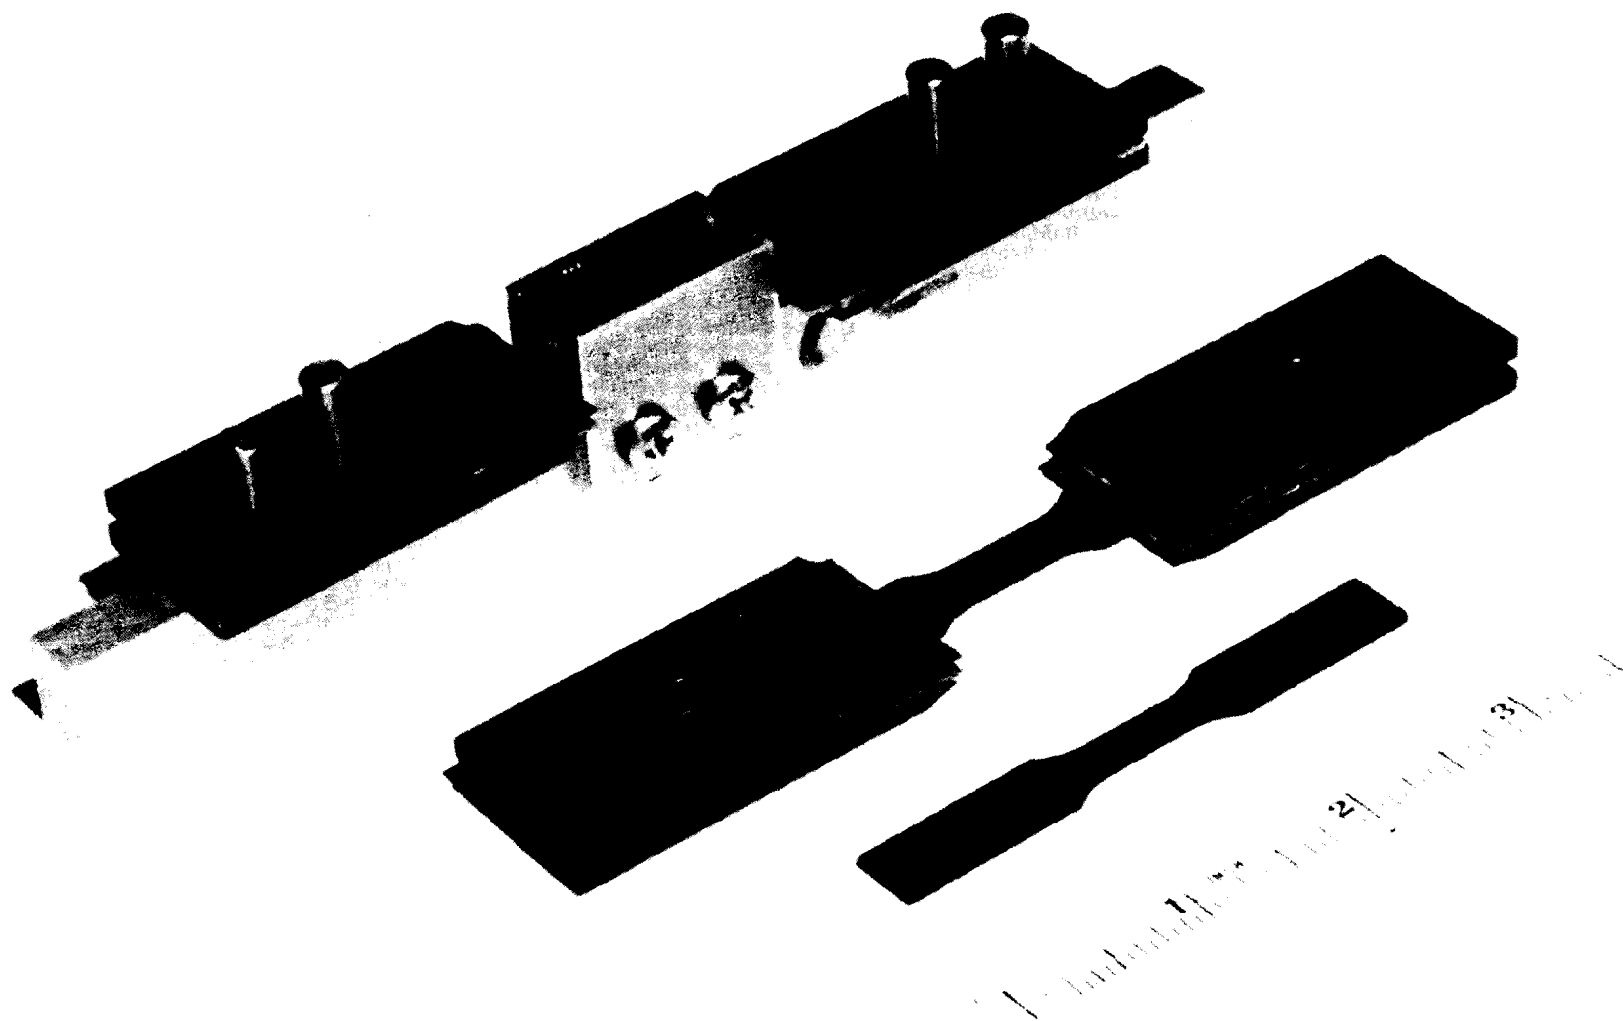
Specially Designed Assembly Fixture for the Bonding of Test Specimens and Doublers
